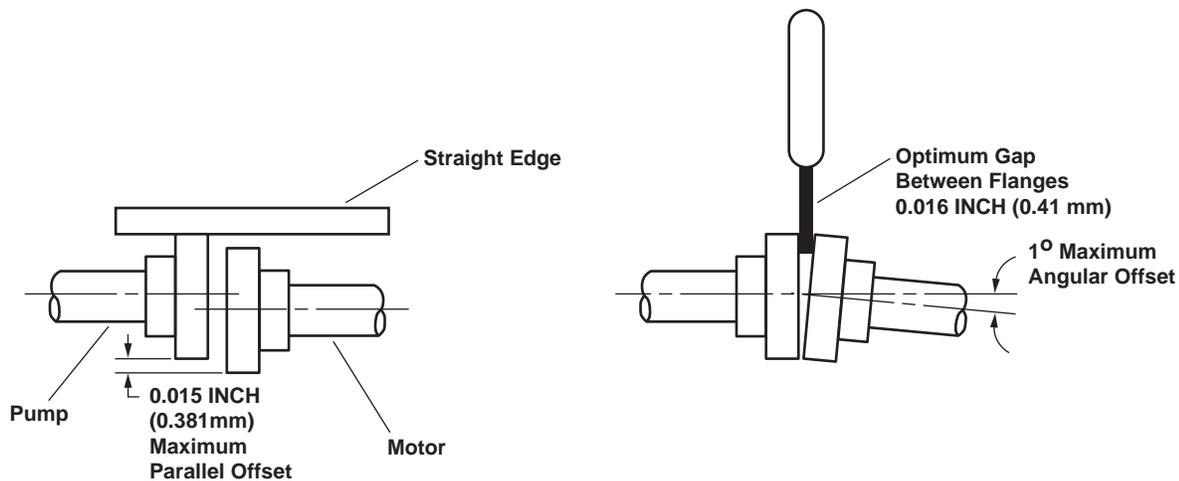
Alignment of Pump Coupling Flange and Motor Coupling Flange
